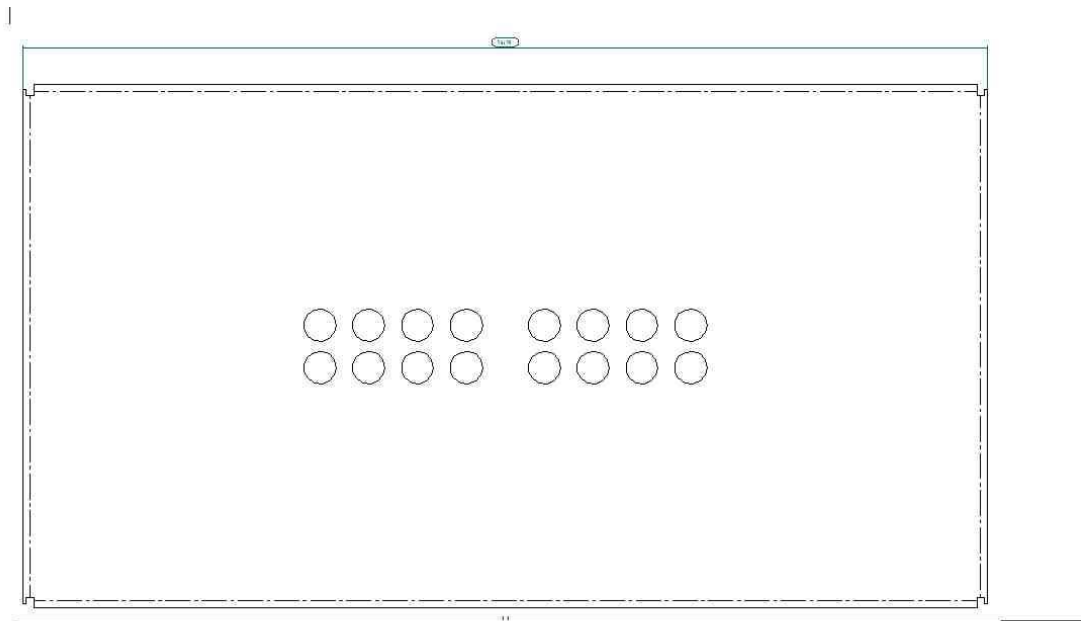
Detail folded open drawing extracted from Solid Edge: Top
